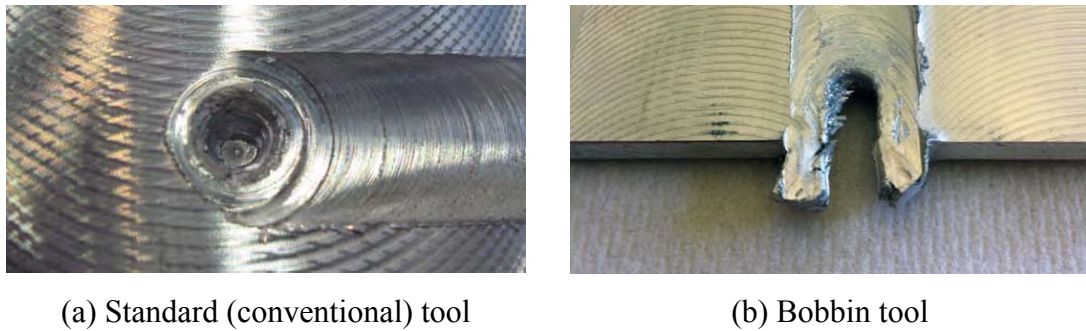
Typical exit holes and run-outs produced when the Tool is removed from the Material
